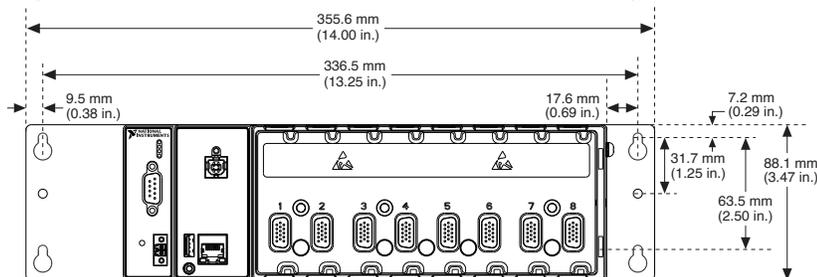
cRIO-9066/9067/9068 Panel Mounting Dimensions, Typical
